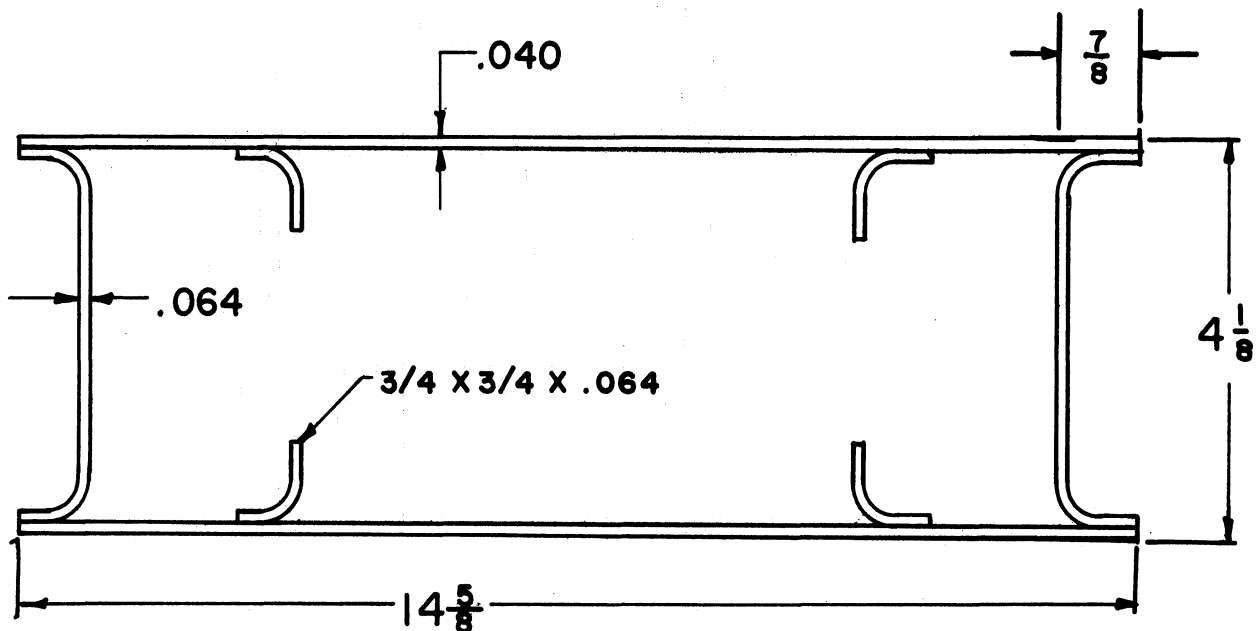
Dimensioned sketch of specimen cross section at center panel.
